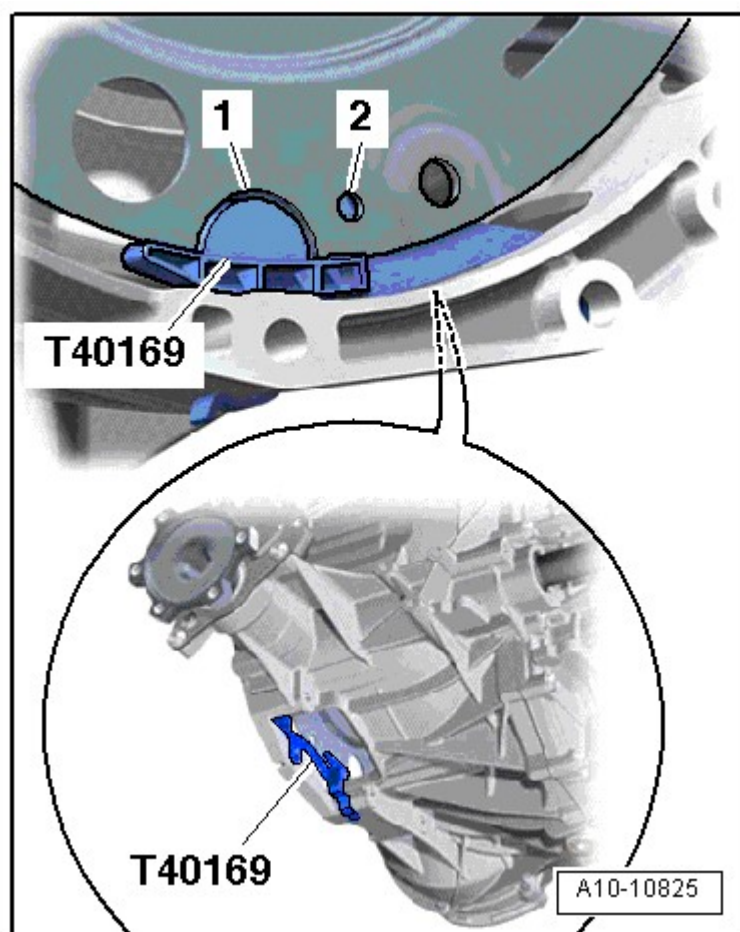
Inserting Assembly Aid T40169 Into Transmission Housing And Flywheel From Below
